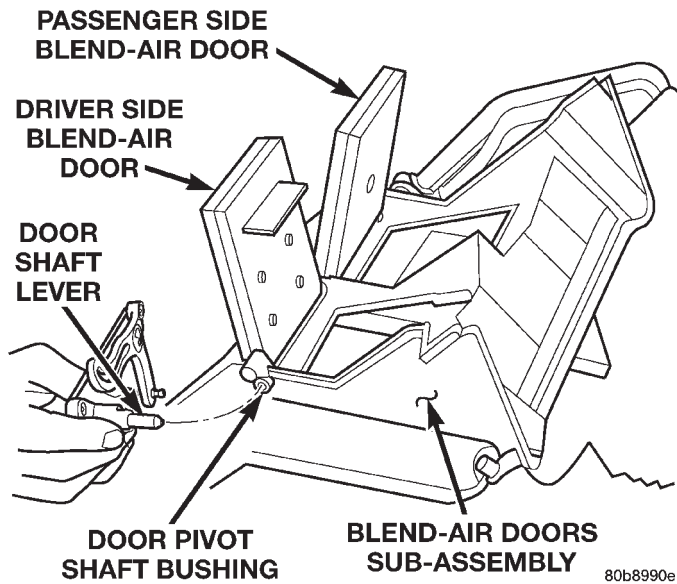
Blend-Air Doors Sub-Assembly (AZC)
